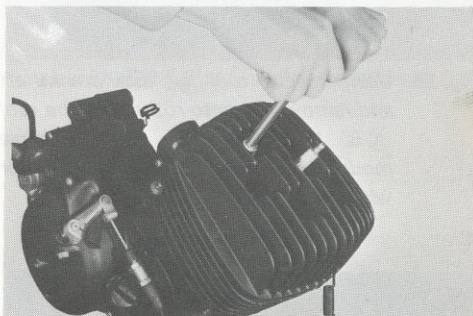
Loosen cylinder head nuts sequentially and evenly, and remove the head.
